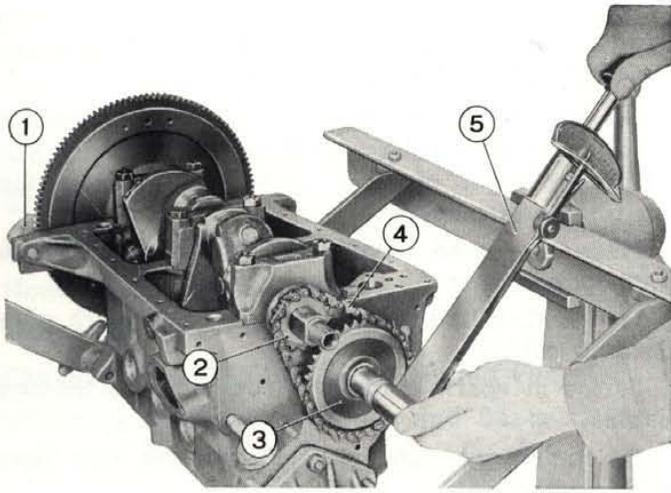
Checking driven sprocket-to-camshaft spacer clearance.
